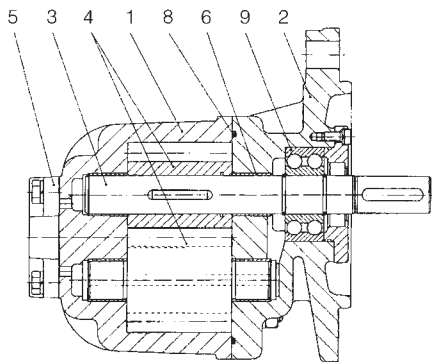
Pump with outboard bearing, special code 196 (without shaft-end sealing)
